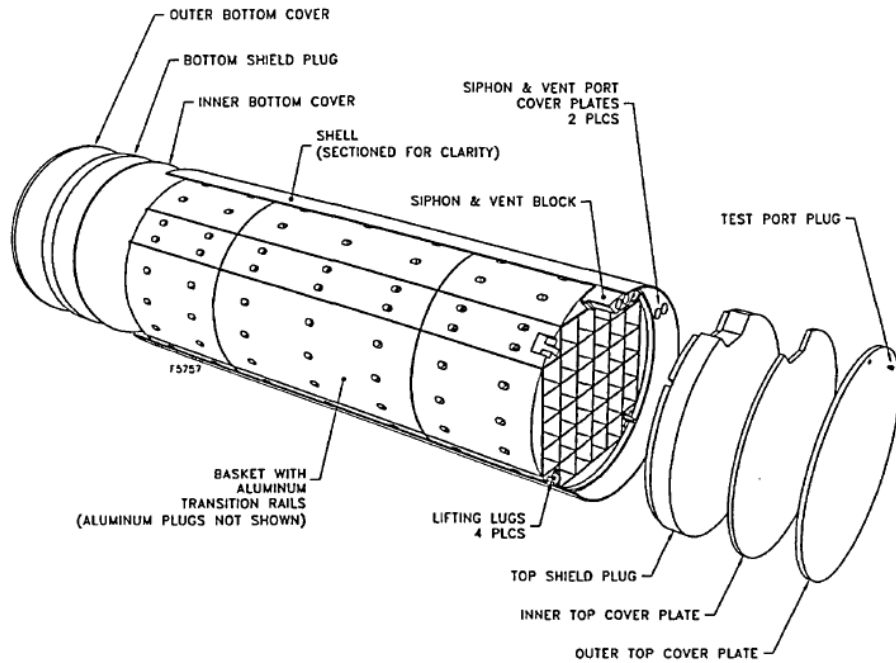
NUHOMS-32PT DSC assembly-tube or plate design (Transnuclear, 2004)
